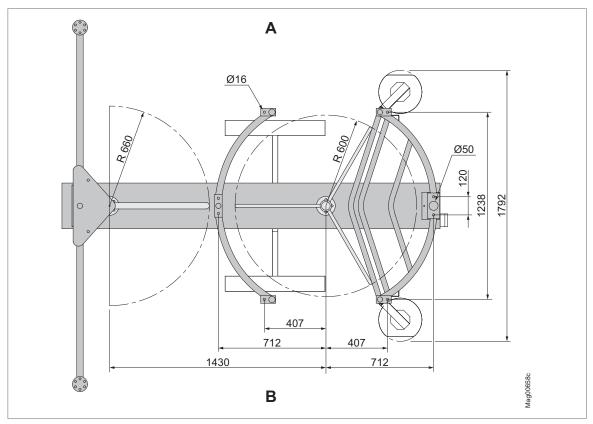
Dimensions – top view (dimensions in mm), here version MPB-B (entrance side right) Illumination and mounting pillars optional
